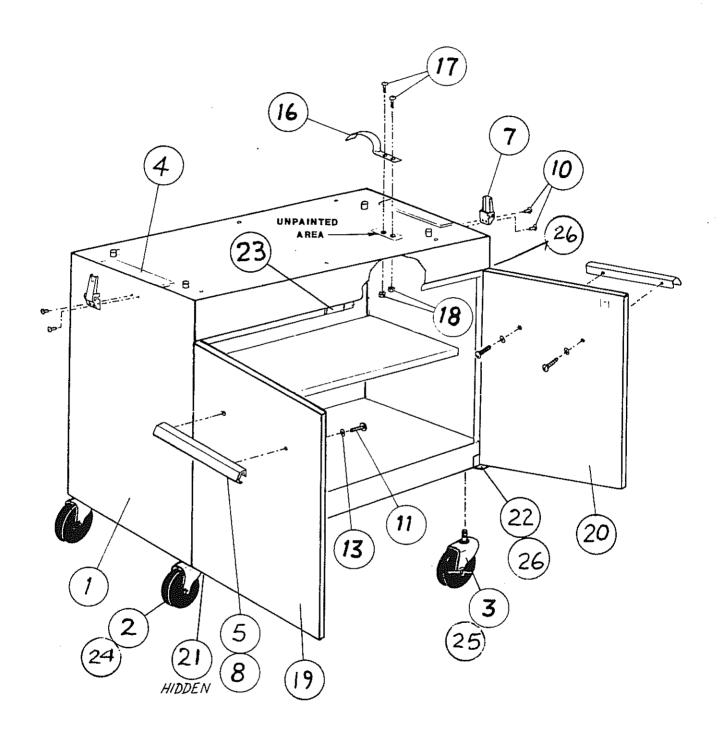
PARTS LOCATION DIAGRAM, CABINET STAND ASSEMBLY
